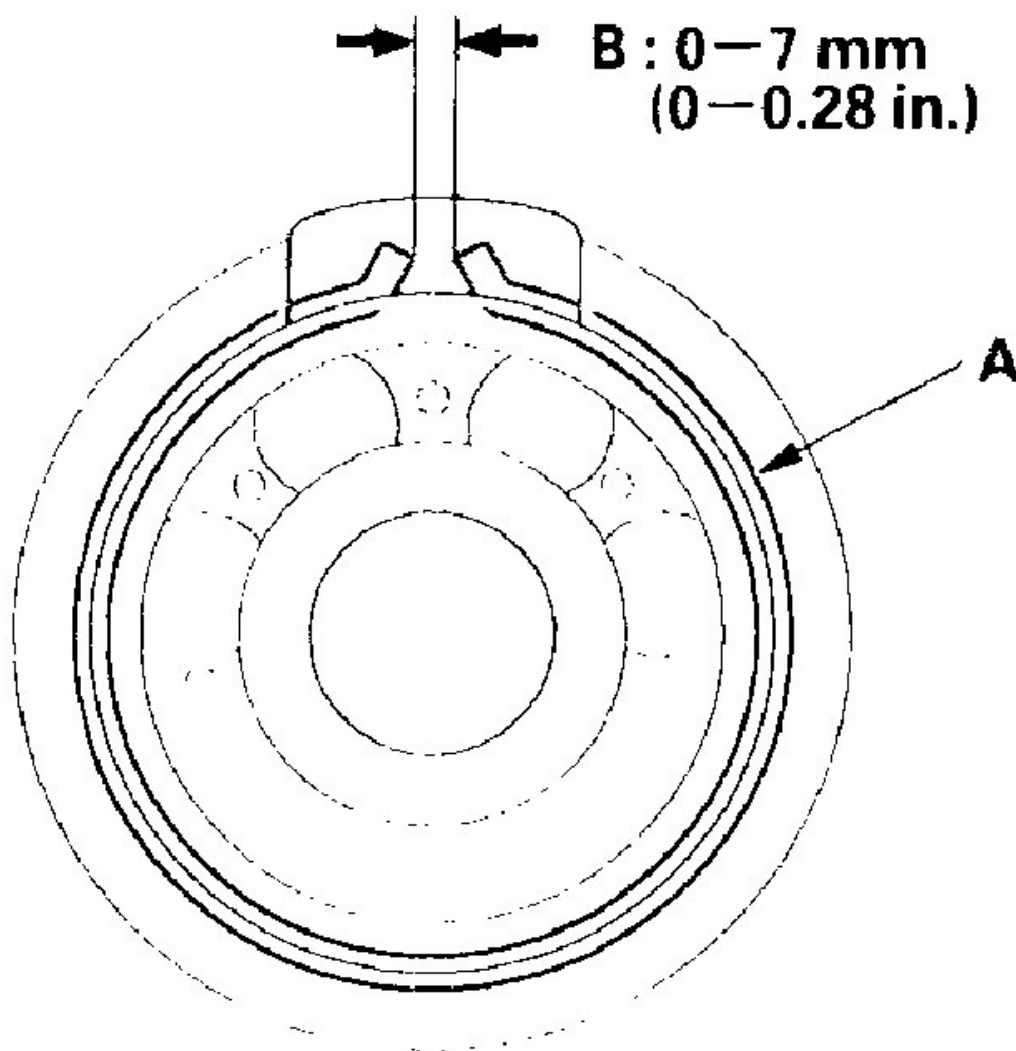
Installing Mainshaft, Countershaft & Secondary Shaft Bearings
